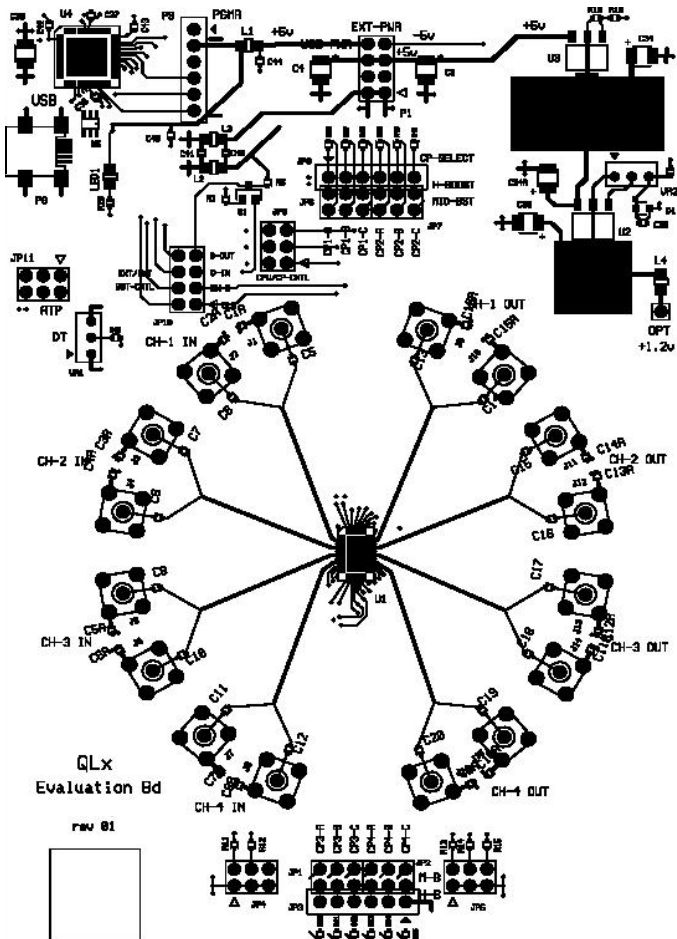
QLX4600-S30 EVALUATION BOARD PCB OUTLINE
